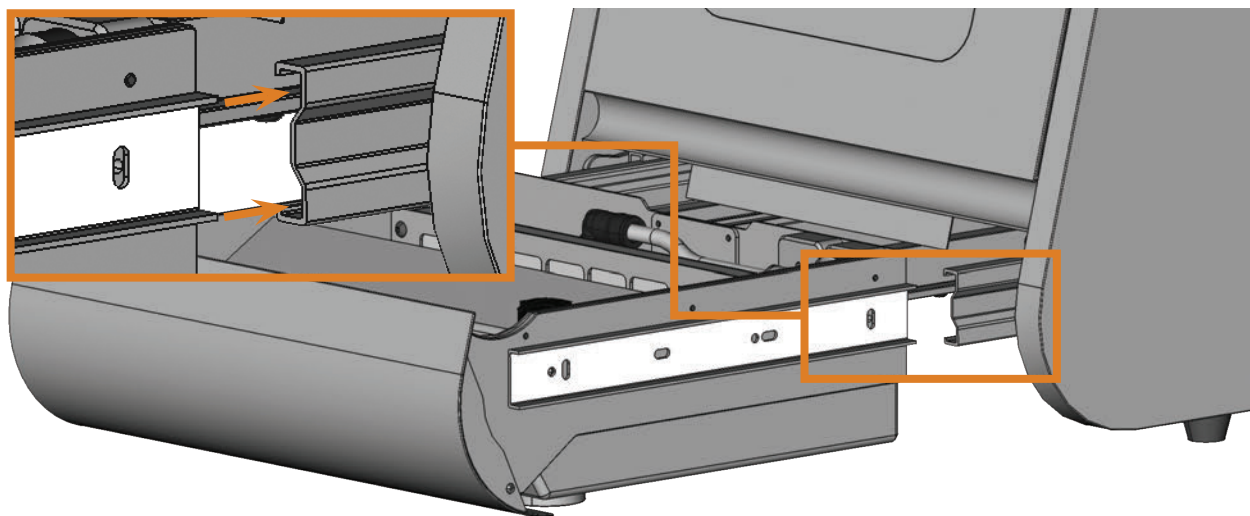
INSERTING THE COOLING LIQUID TANK INTO THE MACHINE
